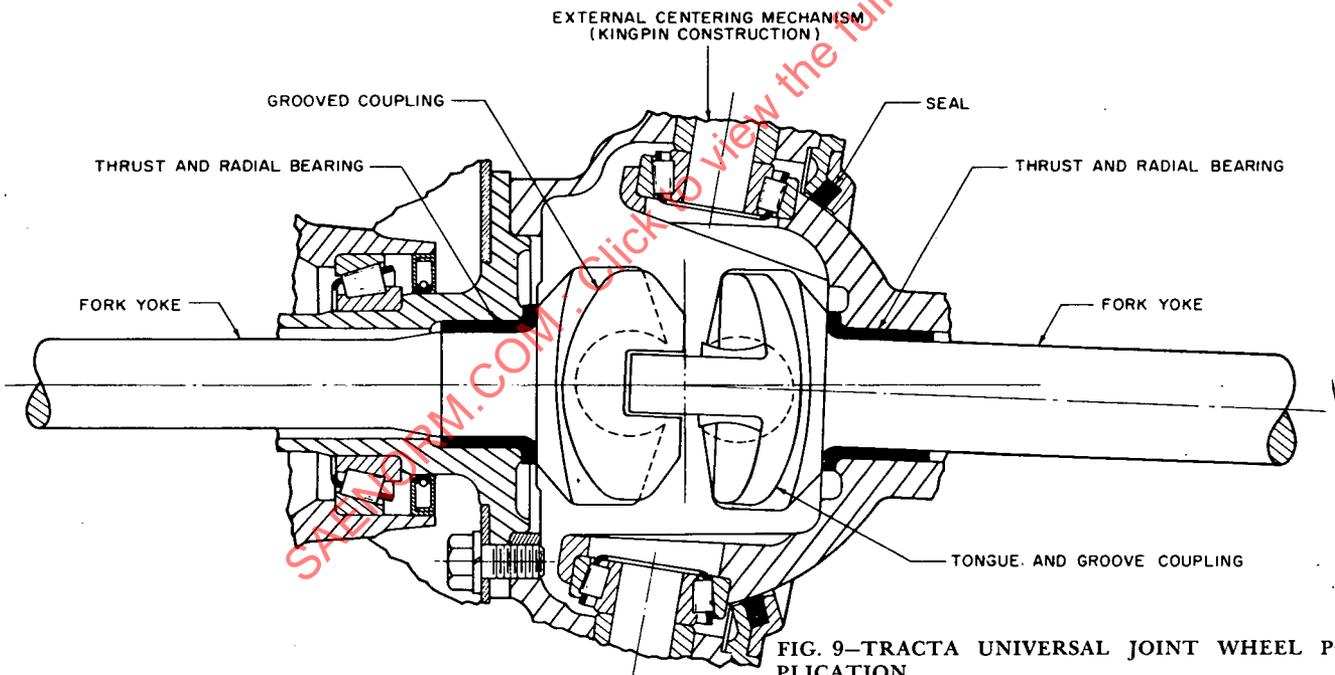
TRACTA UNIVERSAL JOINT WHEEL POSITION AP-
